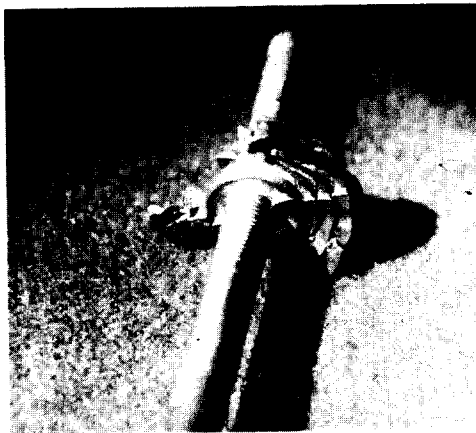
Shape of specimen after cold pressure welding.
